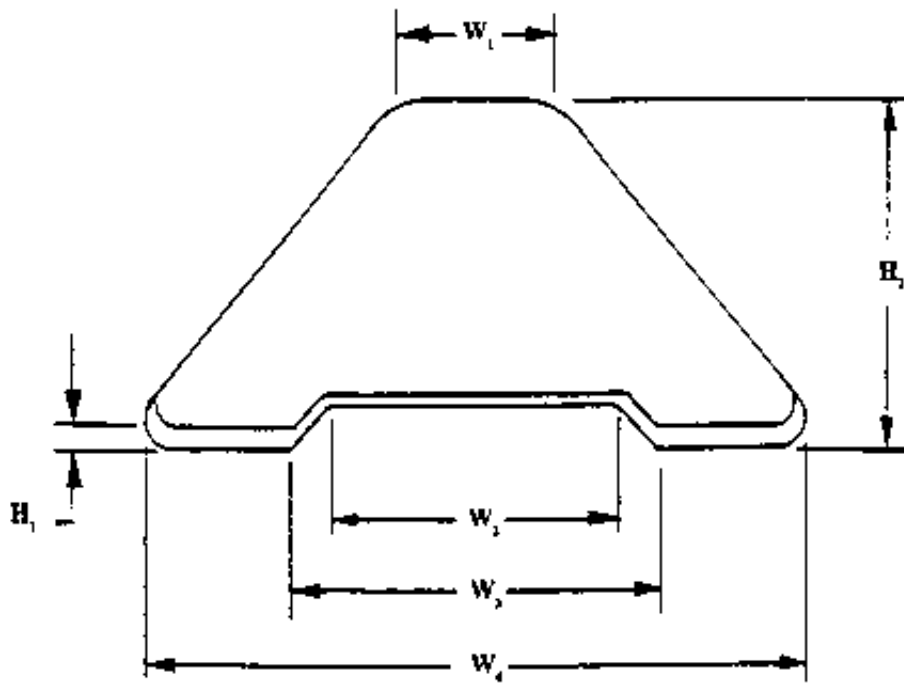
Track Shoe Pad Dimensions (footprint data)
